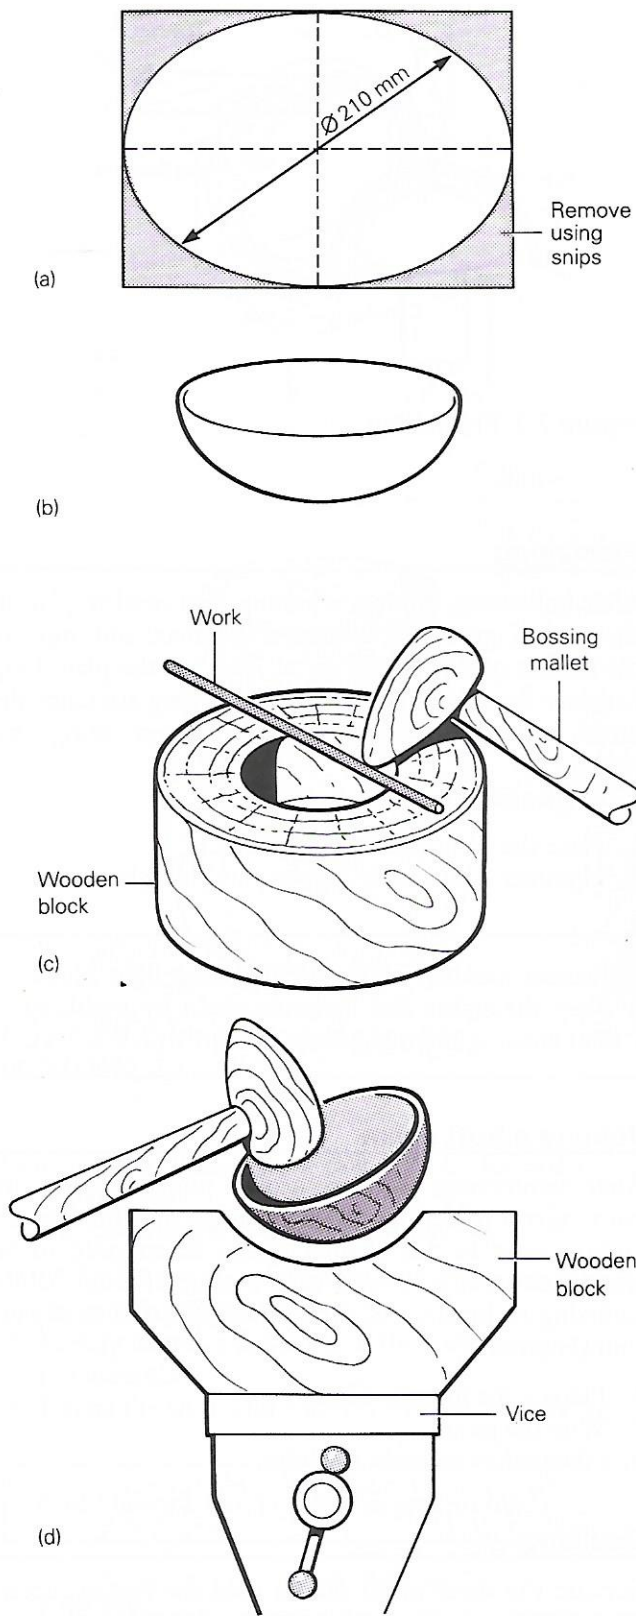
Hollowing: (a) cutting the blank piece to size; (b) shape and size of bowl; (c) malleting from an edge; (d) finishing off the hollowing.
